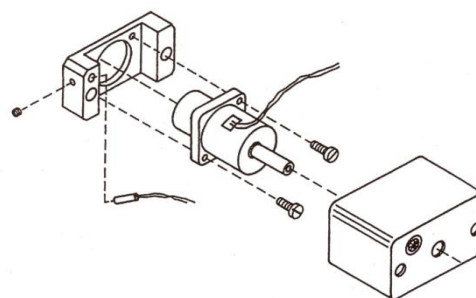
Redesign of motor drive assembly following design for assembly (DFA) analysis [2].
